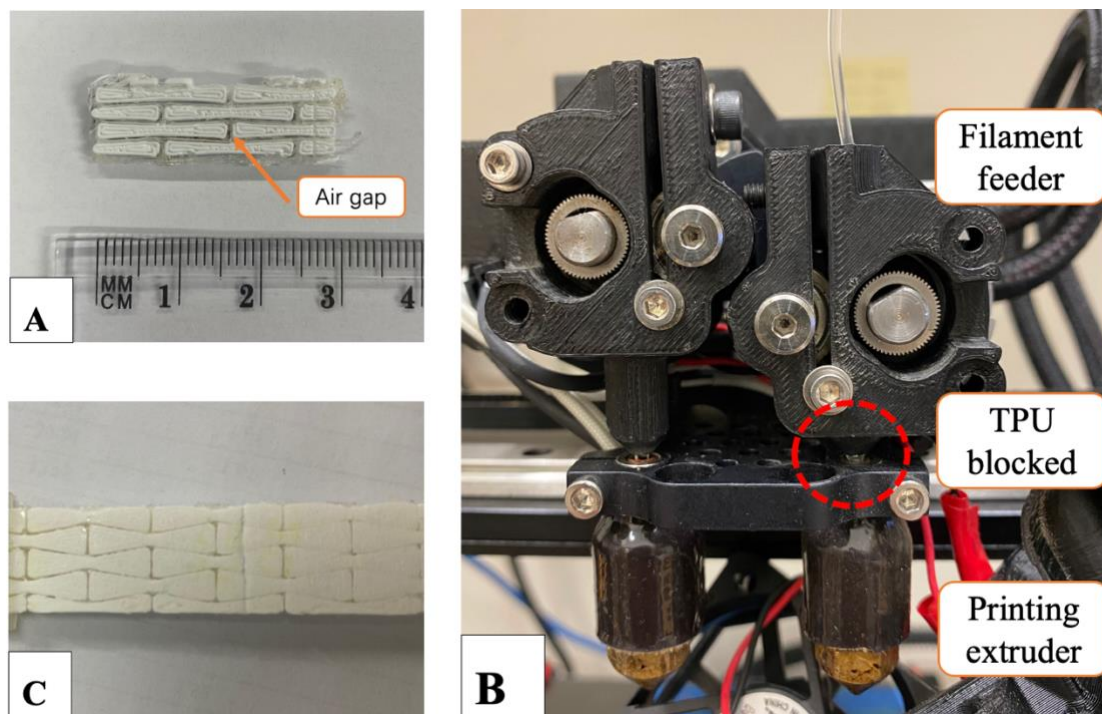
(A) Air gap between PLA and TPU. (B) TPU blocked between filament feeder and printing extruder. (C) Final printing settings printed PLA & TPU structure.
